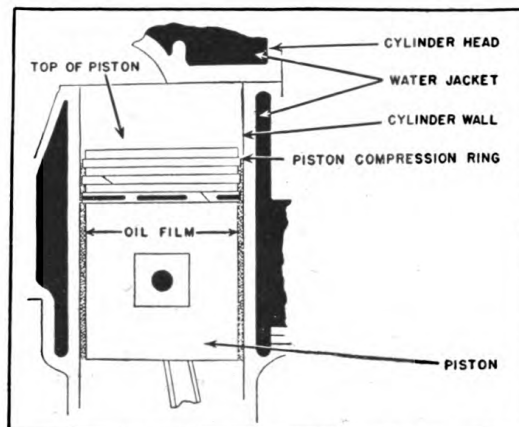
Exaggerated sectional view showing oil seal between piston assembly and cylinder wall.
